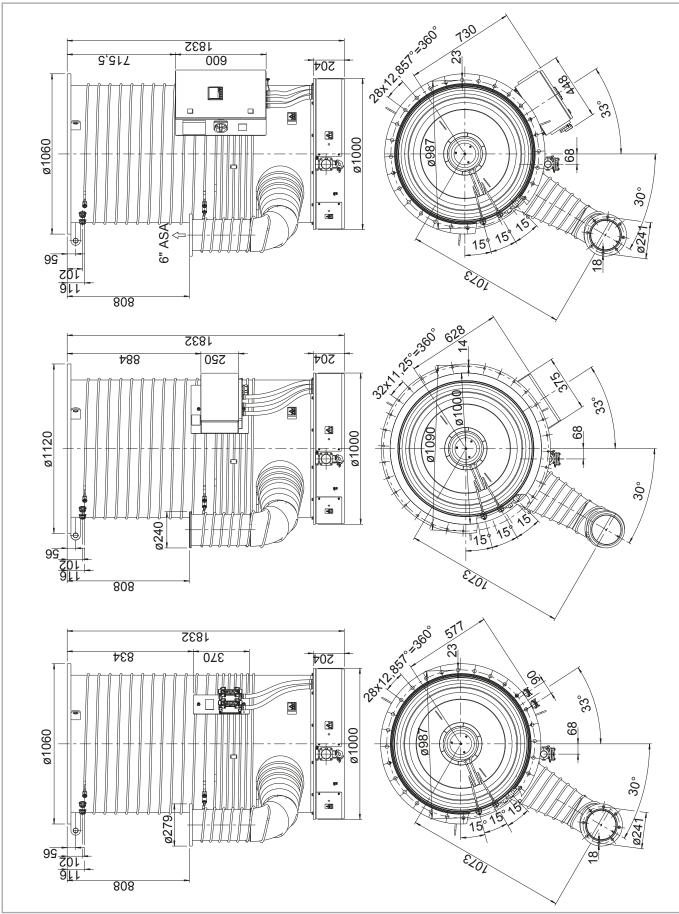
Dimensional drawings for DIJ versions (DIJ 35 with plug, and EEC; DIJ 1000 with junction box)
